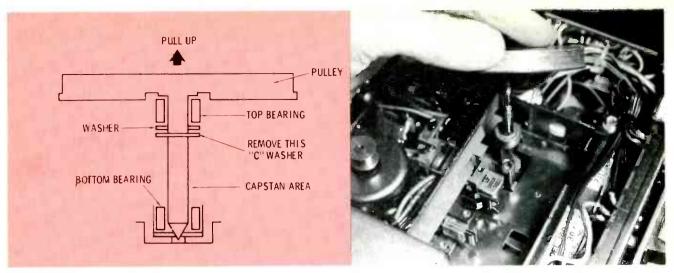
The flywheel/pulley assembly must be removed to reach the head. First, remove the "C" washer (drawing) and the belt, then lift up on the assembly, as shown in photo.
